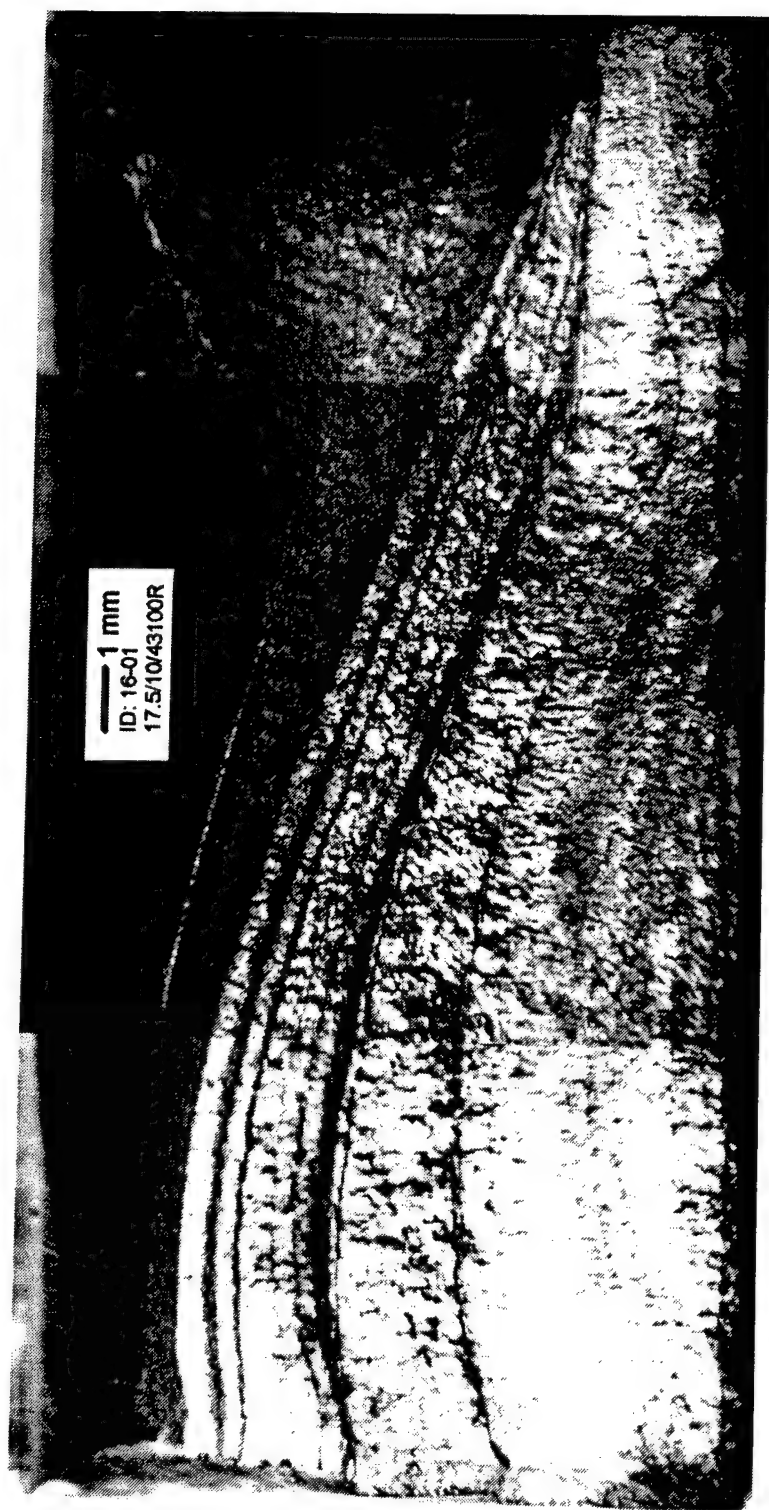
Fatigue fracture surface of the HSLA-80 but weld sample subjected to random loading:
